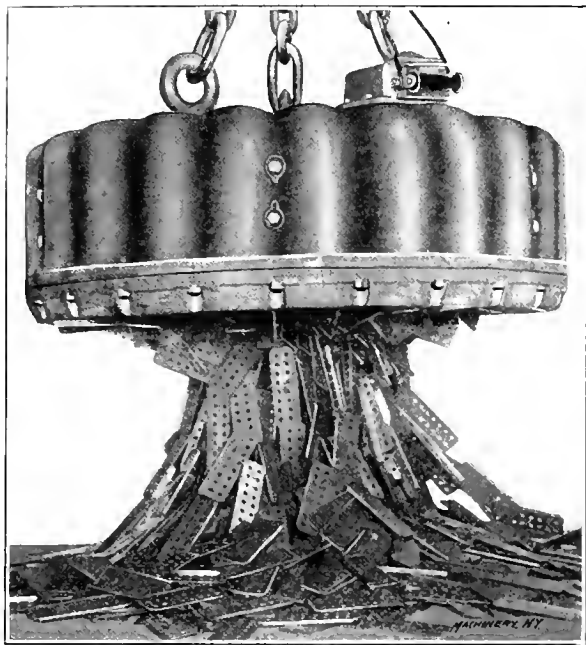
Cutler-Hammer Magnet Lifting Punchings.
